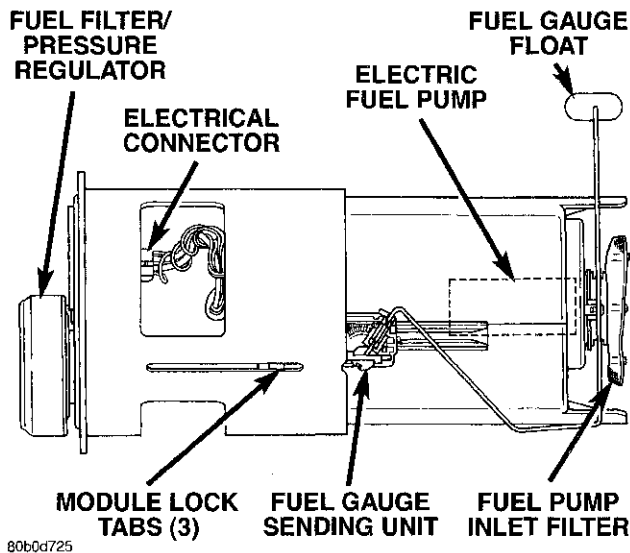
Fuel Gauge Sending Unit Location—TYPICAL Module
